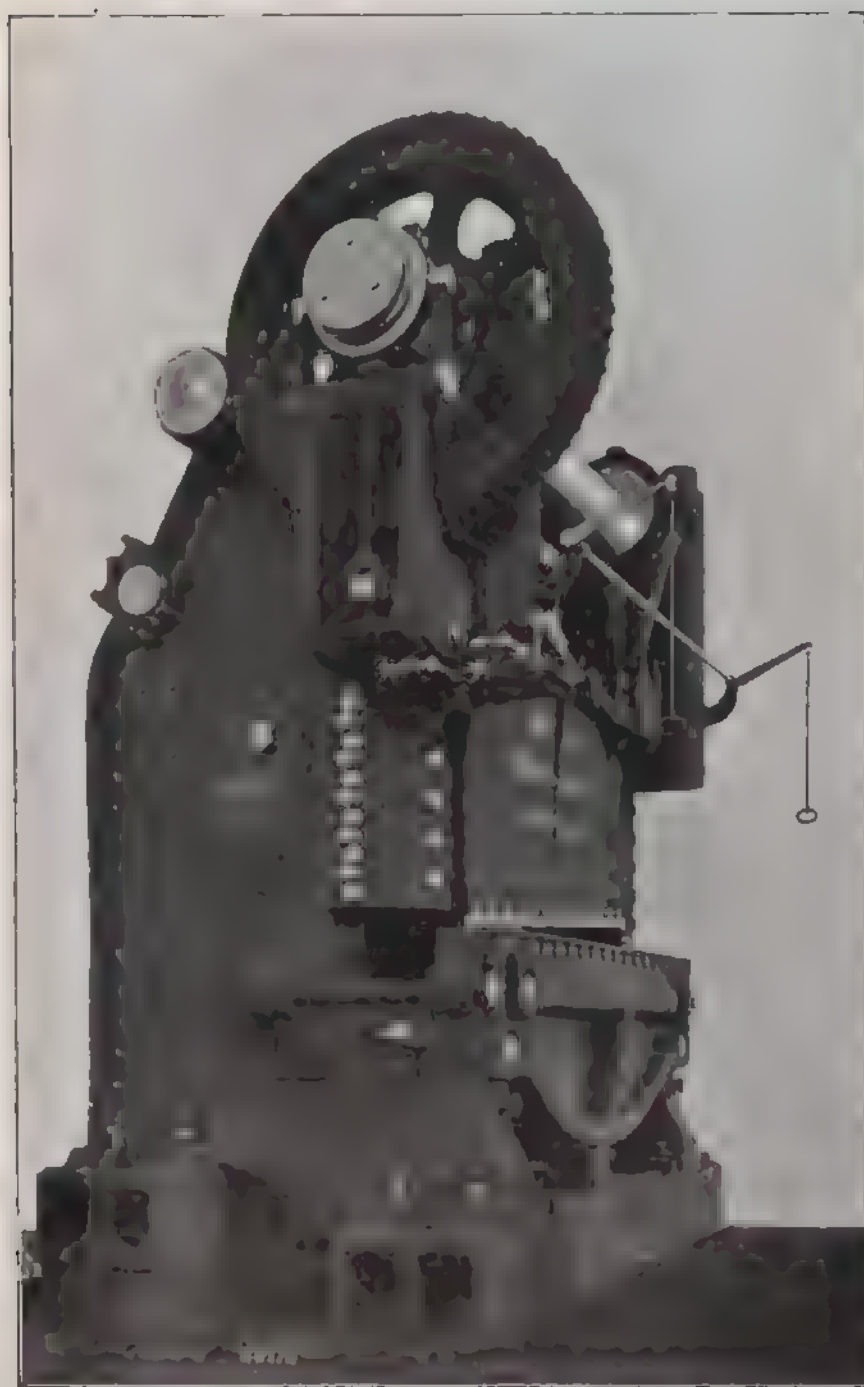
132 IN. PLATE SHEAR, SHOWING CLUTCH FOR OPERATING KNIFE HOLDER.
